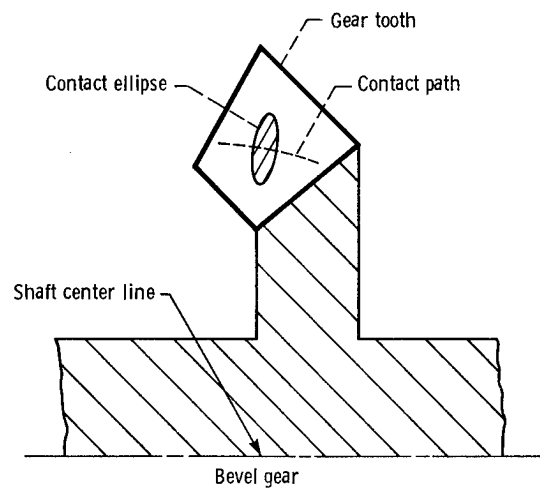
Contact ellipse moves across the face of the gear tooth as the gear meshes with its mating gear (not shown).
